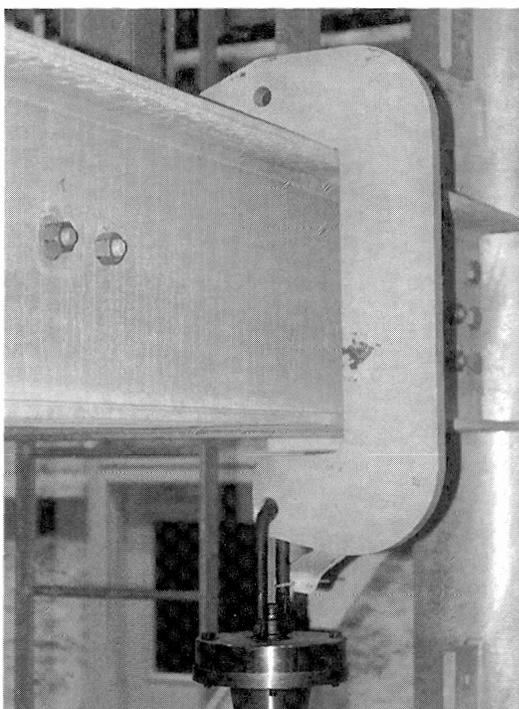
Standardized Fixturing Package for a Rotor That Has an Integral Flange (which includes a rotor hanger, hoist ring, and an adapter plate bolted onto the flange on the rotor).
